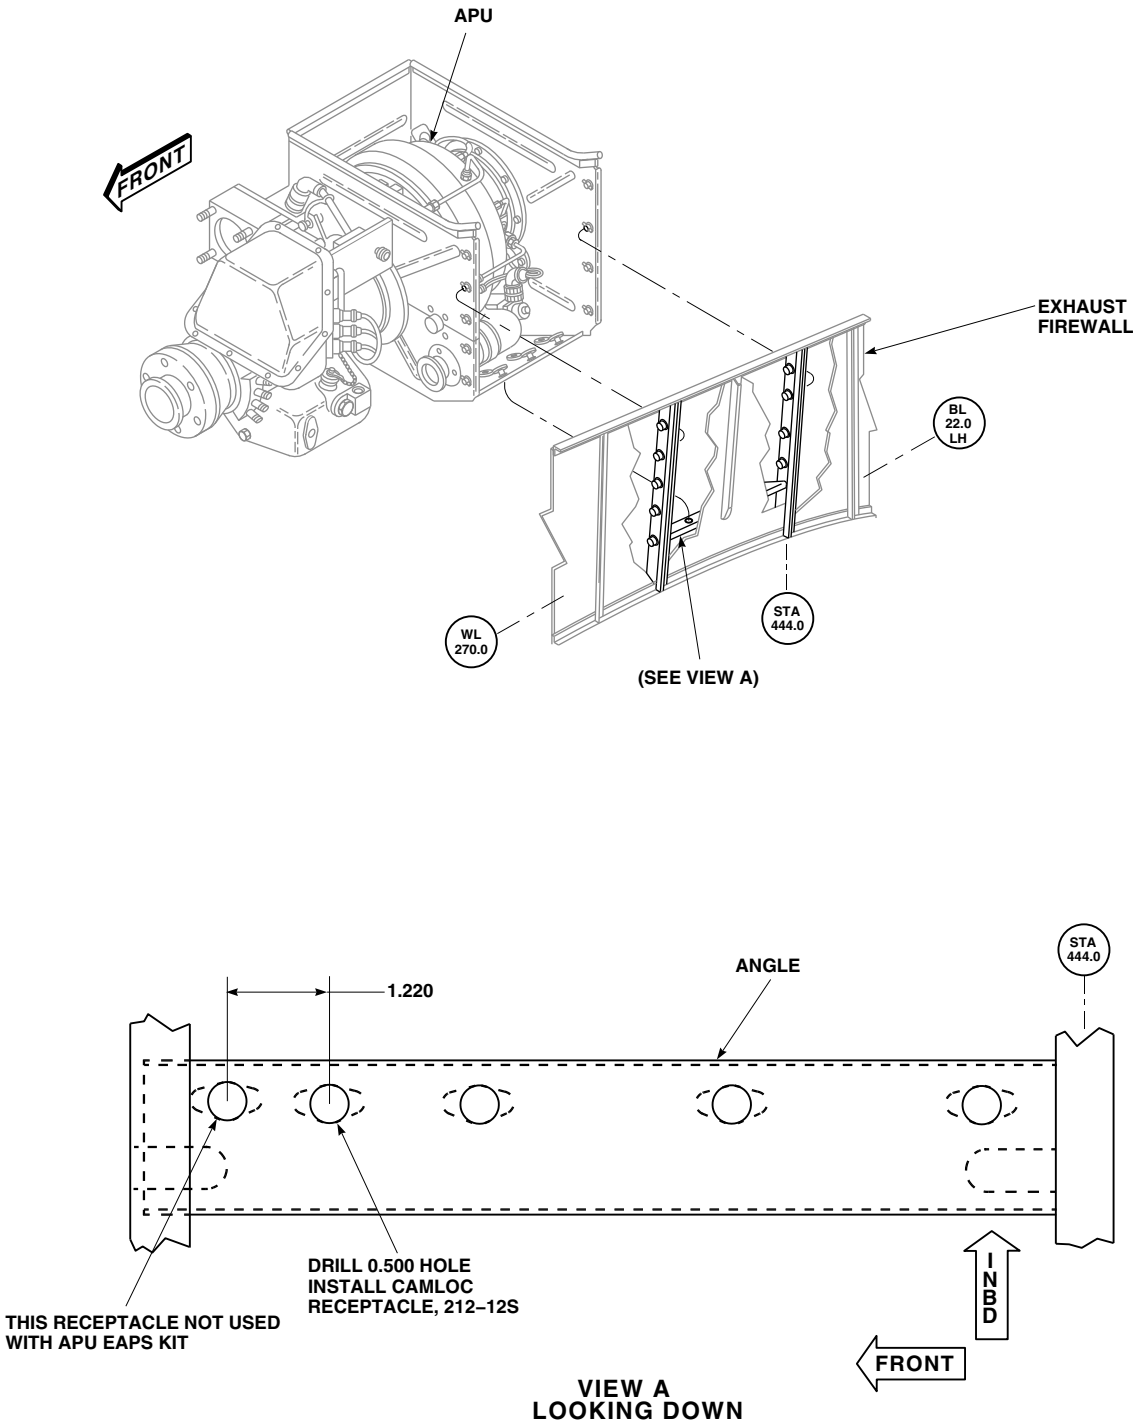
INSTALL APU ENGINE AIR PARTICLE SEPARATOR (EAPS) KIT
